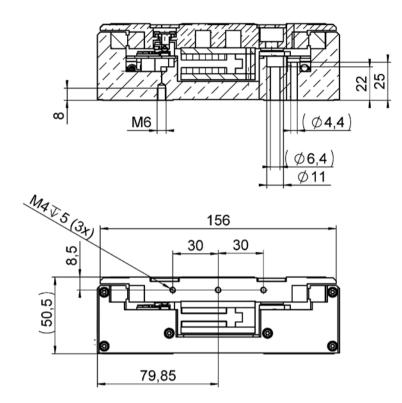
Dimensions of the V-551.4D: Section view A and side view
